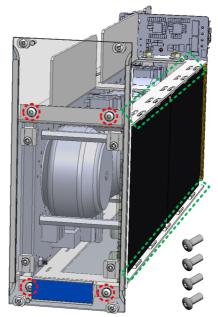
Fasten the ES445x.y with ES5372.1 front plate at the card cage of the ES5372 using four of the supplied TORX screws (T8).
